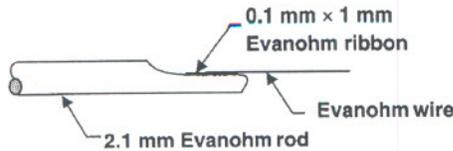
Spot-welded Evanohm wire as used in the new coaxial resistors.
